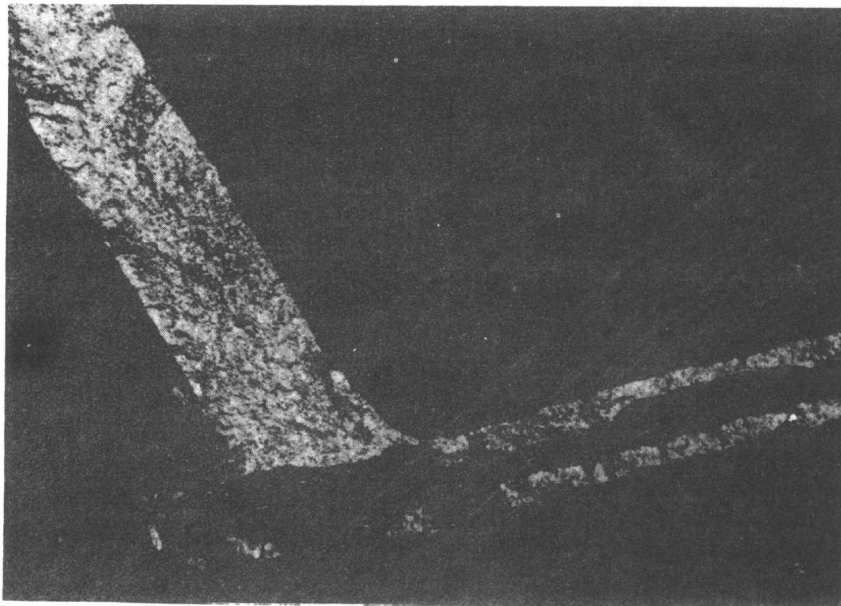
HEAT-TINTED FLAW AT WELD INTERSECTION FROM WHICH FAILURE INITIATED. THIS FLAW HAD BEEN PRESENT SINCE THE VESSEL WAS COMMISSIONED AND HAD BEEN IN SERVICE AT 220 LBS/SQ. IN. FOR 17 YEARS.
